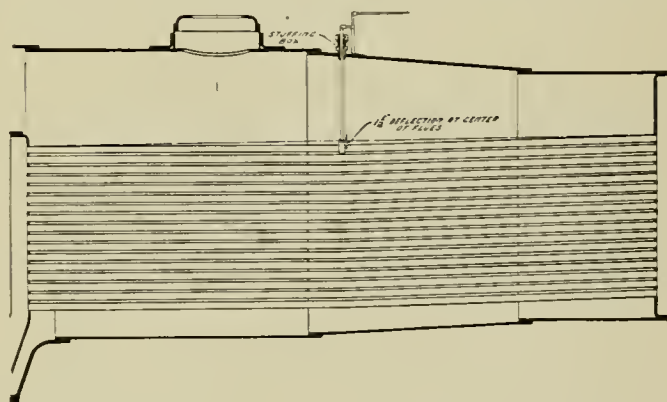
Arrangement of Pointer in Boiler Tube Deflecting Test
